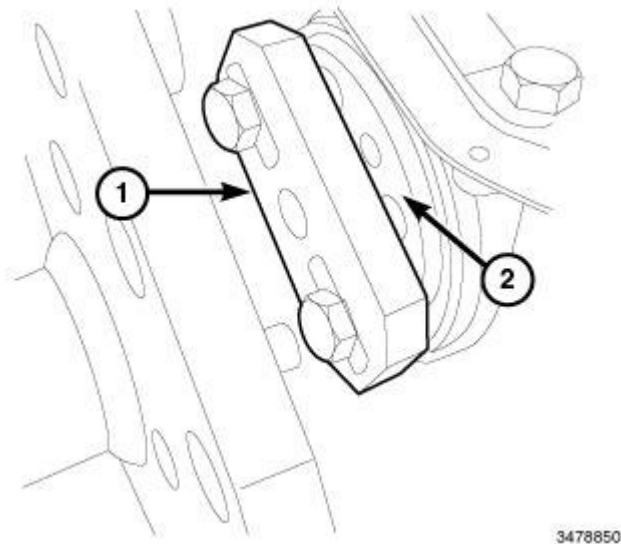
Crankshaft Rotation Flange Tool & Crankshaft
